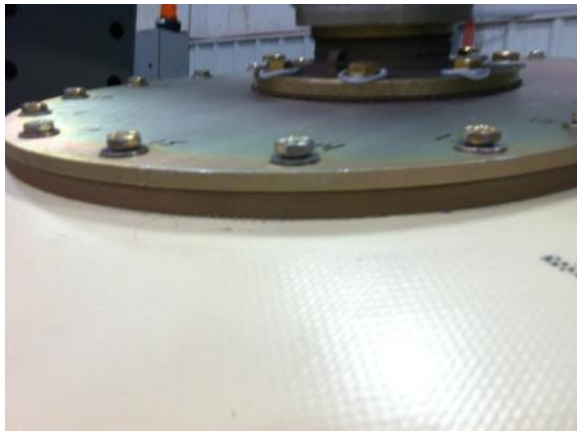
Tank fitting with bolts 12-19 loosened
